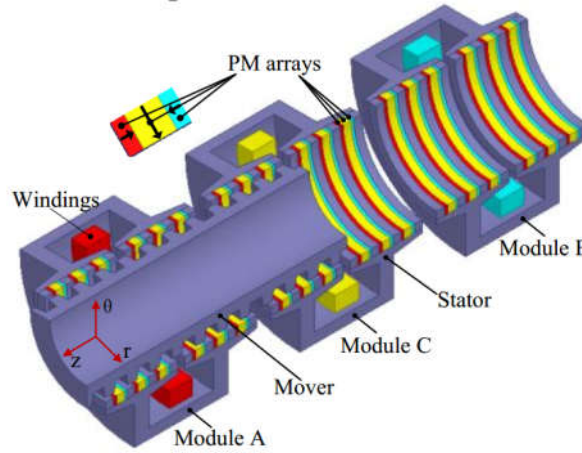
26. Linear stator-PM Vernier machines with tubular stator in [125].
